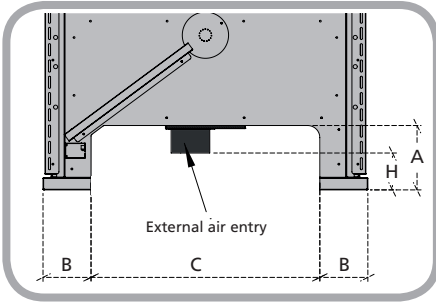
Possible connections of the air intake of the cooker. A = External air intake not connected B = External air intake on the floor C = External air intake on the wall
